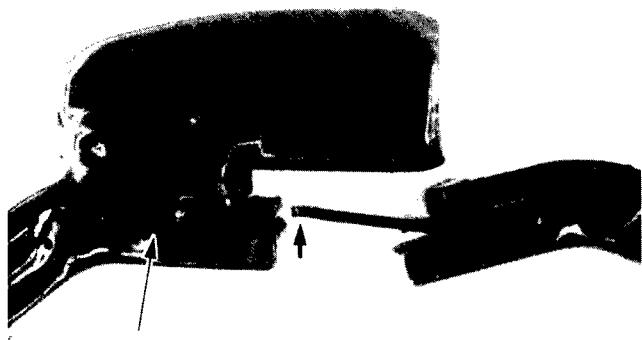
A fractured pawl; the smaller arrow is pointing to the plastic deformation and the longer arrow is showing the cracked weld. Mag. 2.2X
